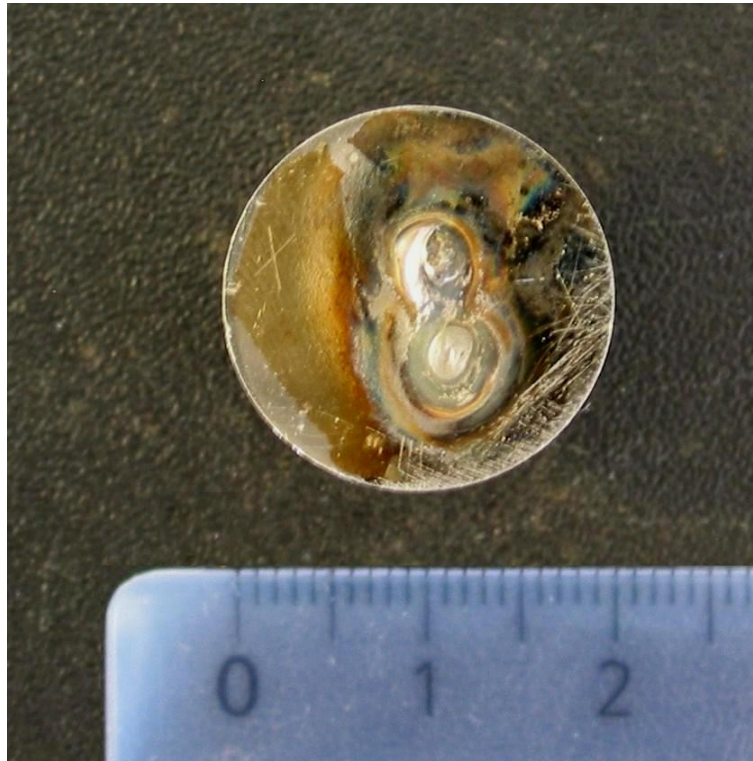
Photograph of the cylindrical Weld Sample 3, showing the 10 mm long weld and the heat affected surface.
